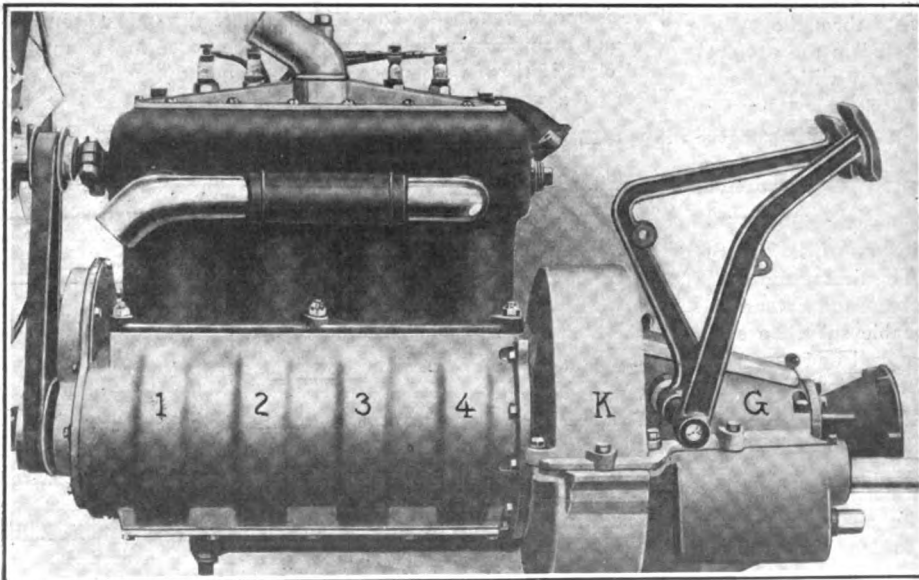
Left side of motor, showing broad flange for connecting cylinder casting to crankcase
